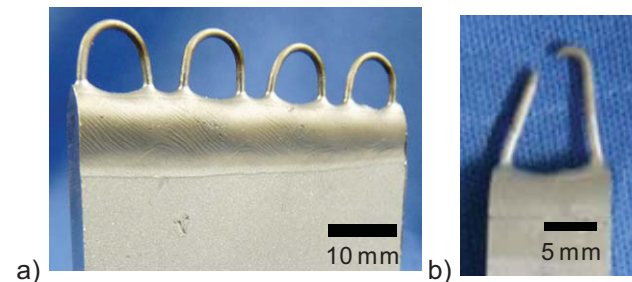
Ti loops after welding (a) and after tensile test (b)
